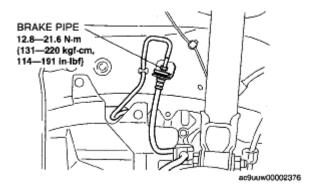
Identifying Brake Pipe To Original Positions & Torque Specifications Courtesy of MAZDA MOTORS CORP.
